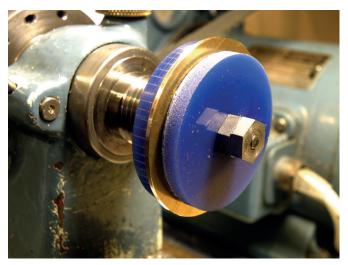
The mandrel held in the headstock spindle of a Schaublin SV70 lathe.
